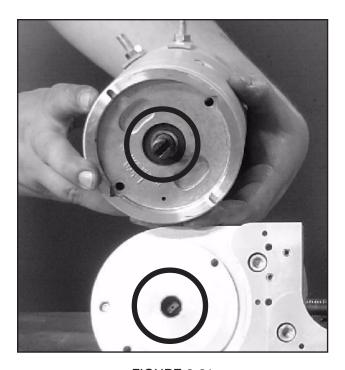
Carefully align Pump Shaft to Motor Shaft using the Pump Shaft Extension and assemble Motor to Base Plate.
